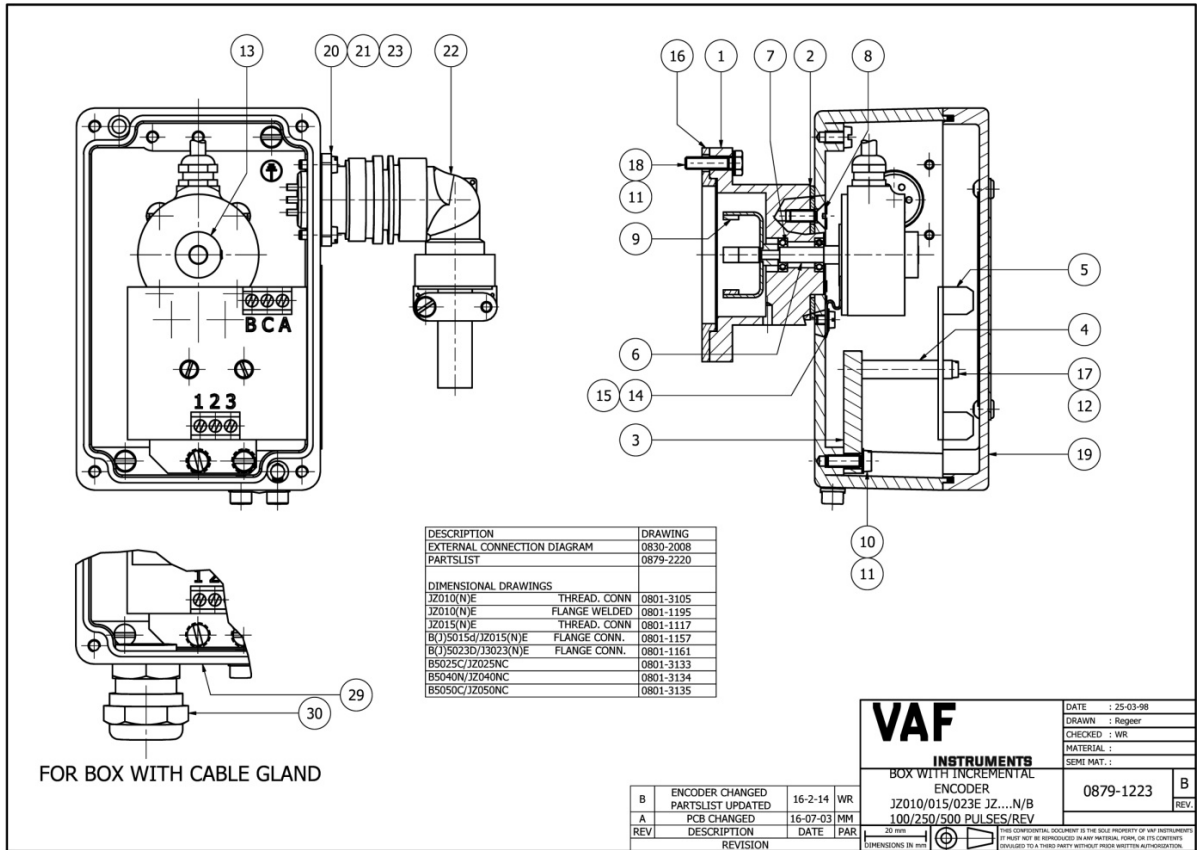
Drawing 0879-1223 – Incremental encoder box assembly drawing
